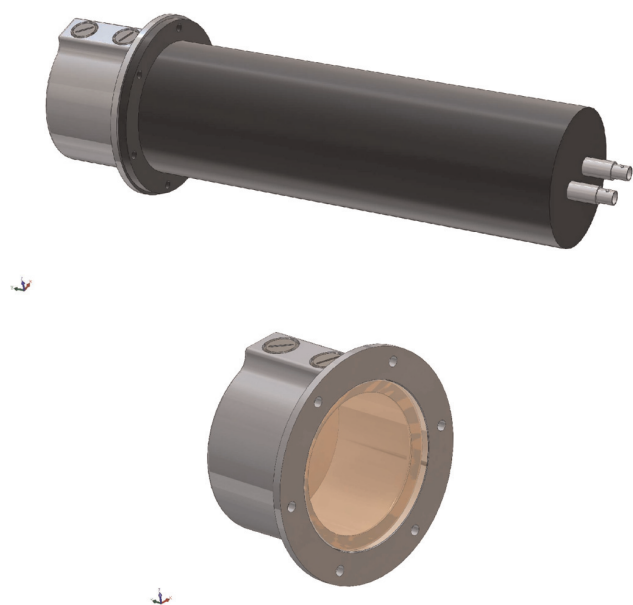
CAD drawing of the NE-213 detector. Top panel: the detector. The large black cylinder to the right is the magnetically shielded 3 in ET Enterprises 9821KB photomultiplier-tube assembly. The small gray cylinder to the left contains the NE-213. Bottom panel: an enlargement of the small gray cylinder “cup”. The screws on top allow for the filling or draining of the liquid cylinder. A borosilicate-glass window (light brown) serves as the optical boundary. (For interpretation of the references to color in this figure caption, the reader is referred to the web version of this article.)
